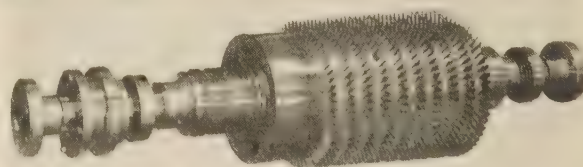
ROTOR OF AXIAL COMPRESSOR AS PER FIG. 19, WITH ROLLER BEARINGS AND COUPLING FLANGES
